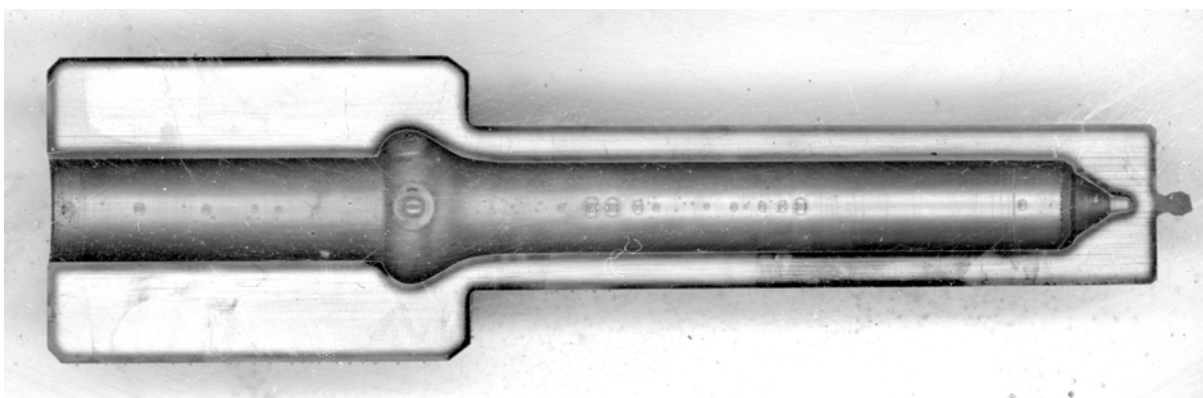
Well formed and uniform carburized layer in the hole of the fuel injector
